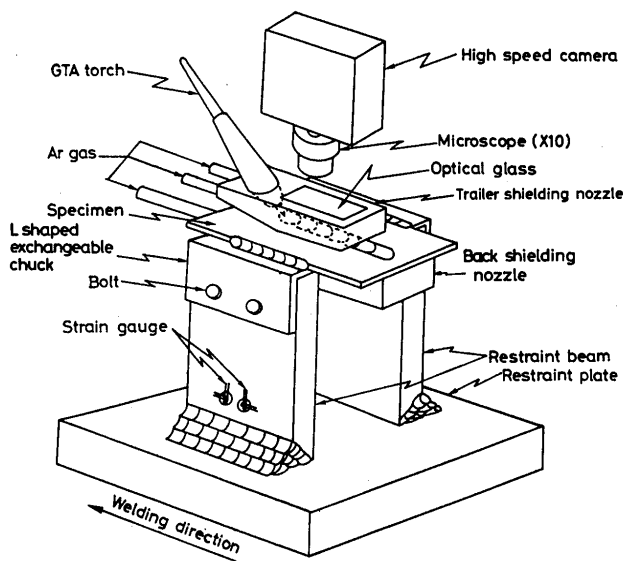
Schematic illustration of device for MISO technique utilizing tensile cracking test with U-form hot cracking device.
